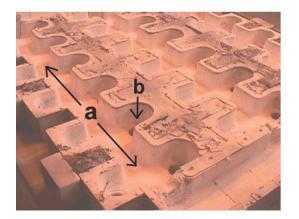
Hot-top casting tabletop: (a) launder, (b) hot-top above mold (launder terminal).
